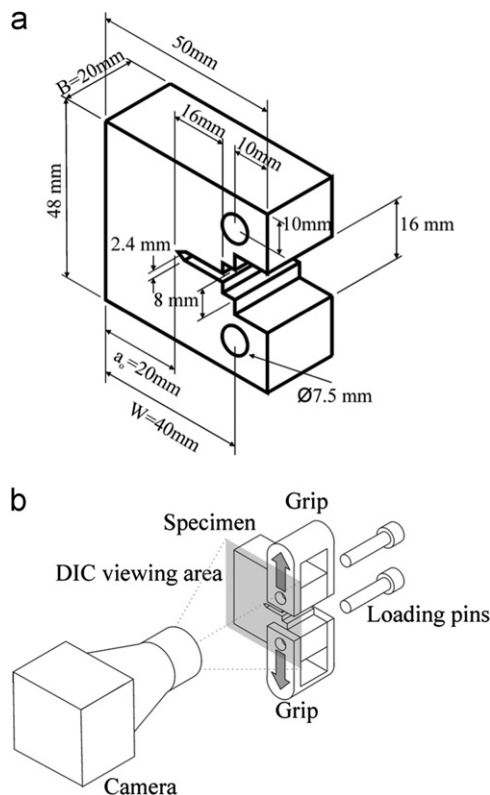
Fracture test overview: (a) dimensions of compact tension specimen and (b) arrangement of test setup.
